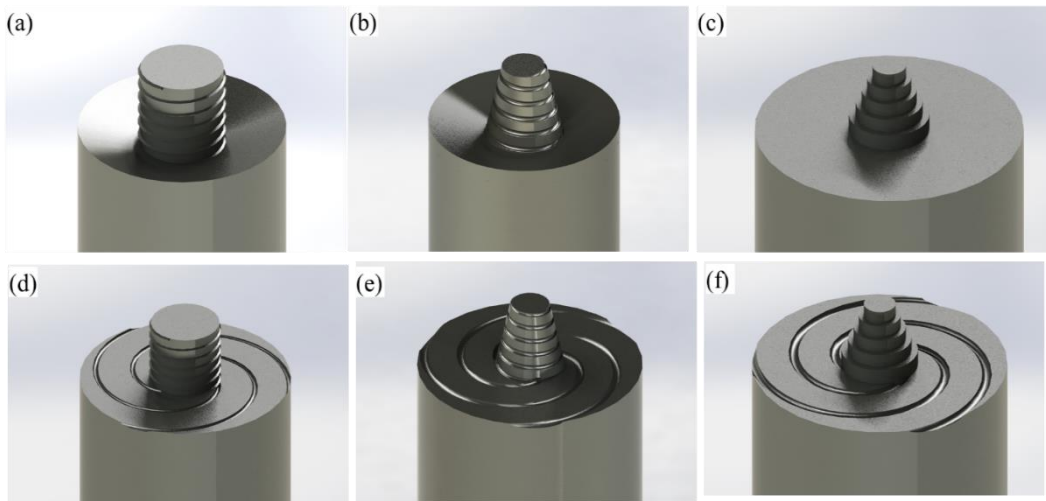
Different pin profile (a) cylindrical threaded (b) cylindrical tapered threaded (c) stepped cylindrical (d) scrolled shoulder cylindrical threaded (e) scrolled shoulder with cylindrical tapered threaded (f) scrolled shoulder with stepped cylindrical threaded
